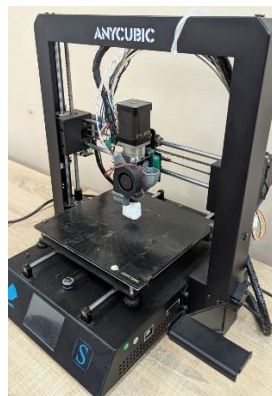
Anycubic Mega S 3D printer equipped with a screw extruder for printing composite mixtures
